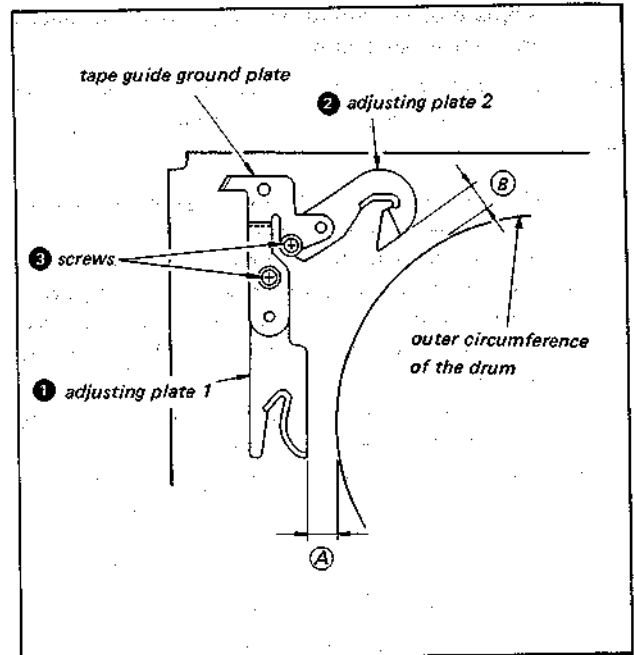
Measurement of the position of adjusting plates 1 and 2
